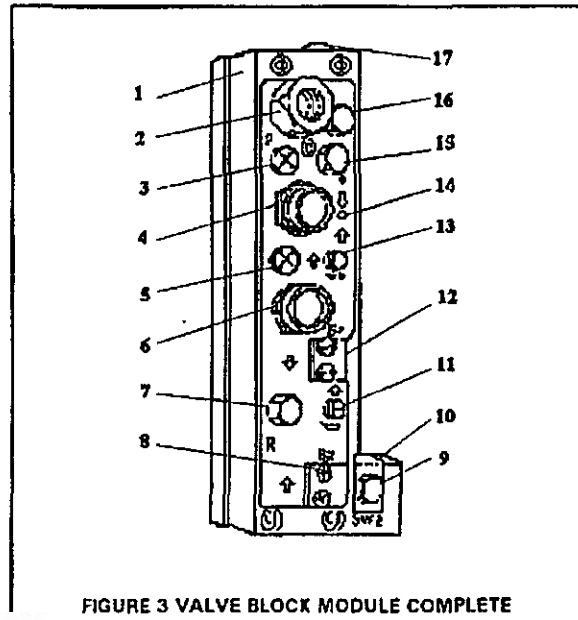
VALVE BLOCK MODULE COMPLETE
